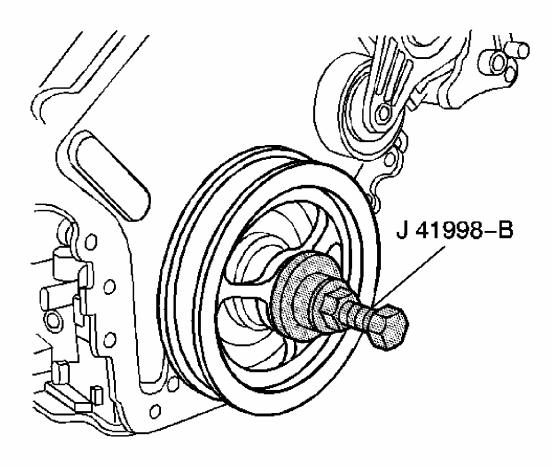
Identifying J 41998-A Installing Crankshaft Balancer Courtesy of GENERAL MOTORS CORP.
